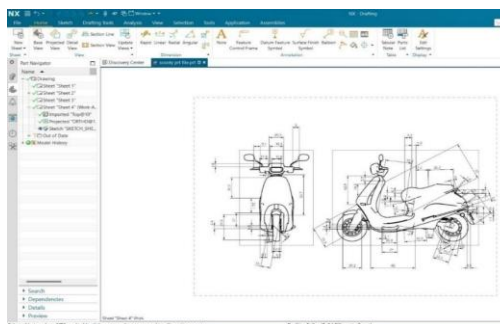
Adding dimensions to the design model by using dimension tool in the software.
